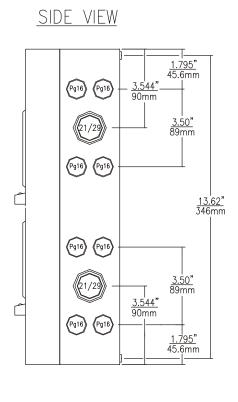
Six Module System Enclosure Dimensions (80-0008)
